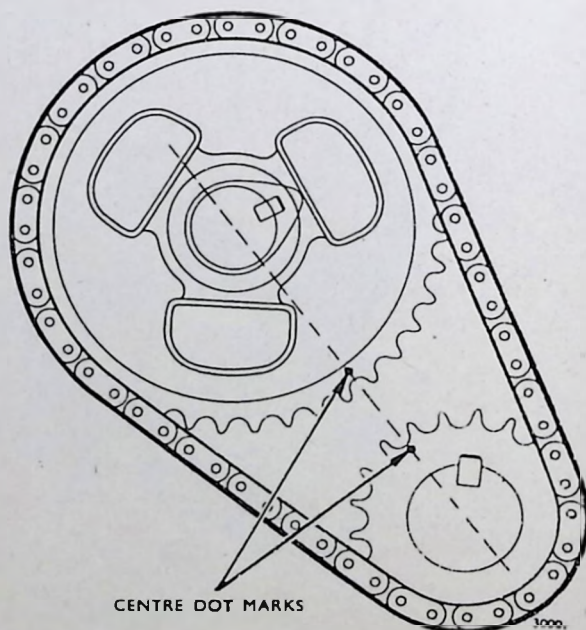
Timing wheel alignment (O.H.V. engine).
